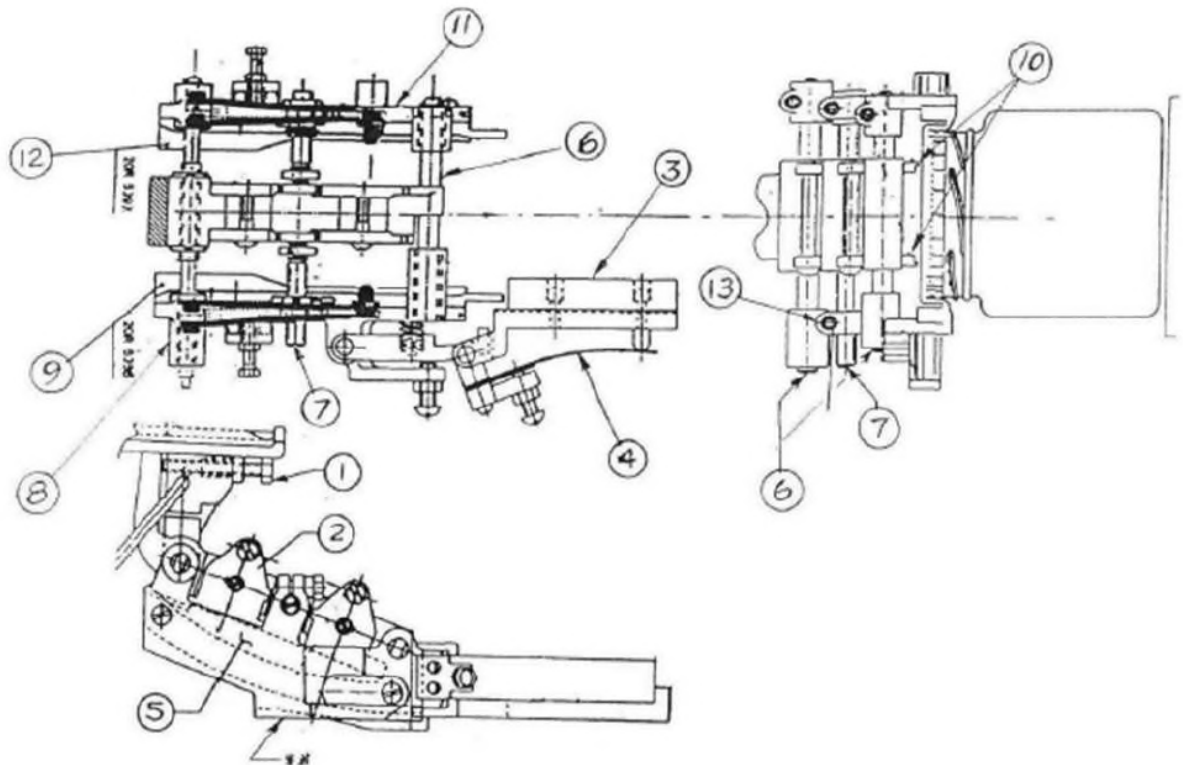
Standard Lower Cap Track Parts - Right Hand
